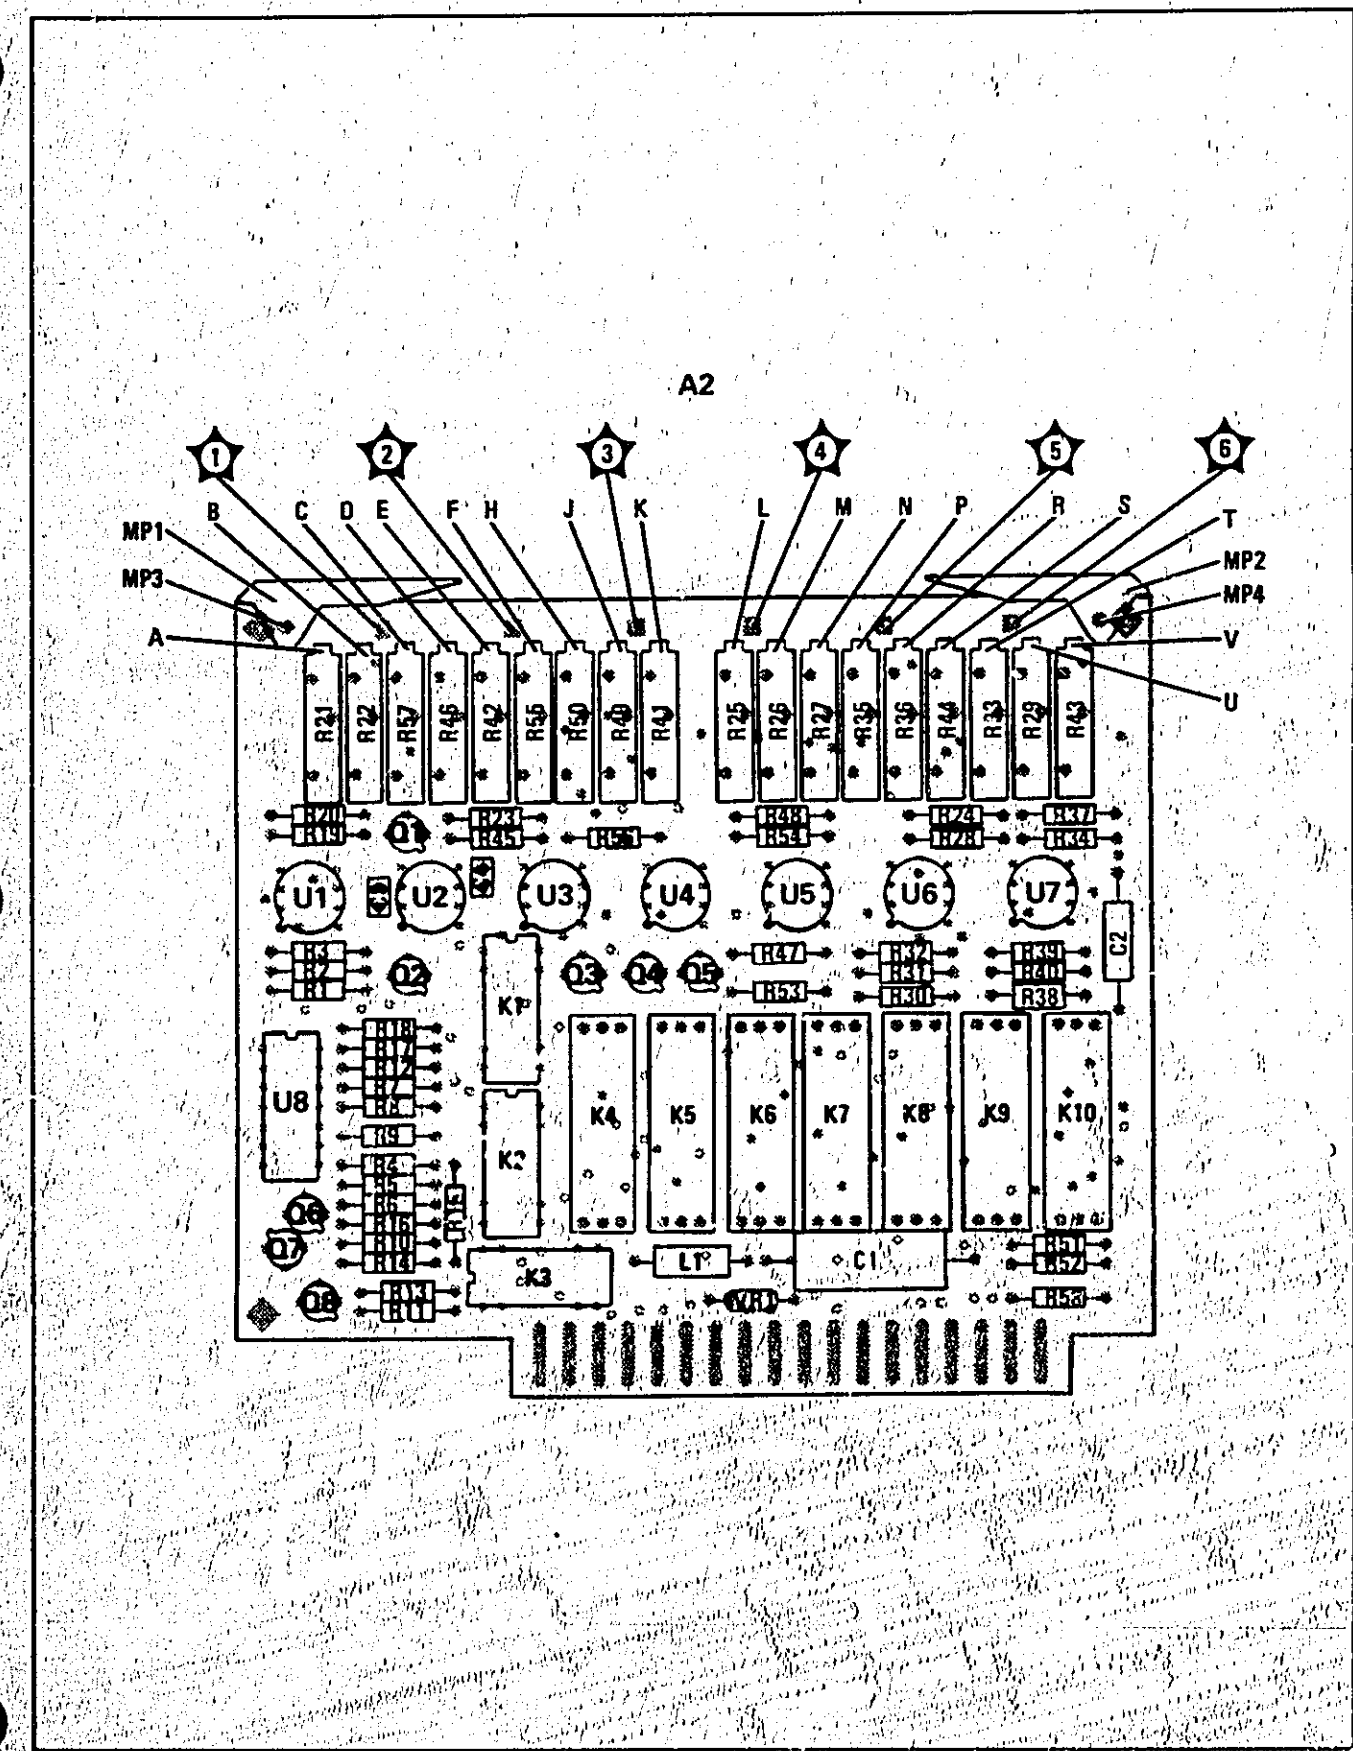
A2 Frequency Control Assembly, Component Locations
